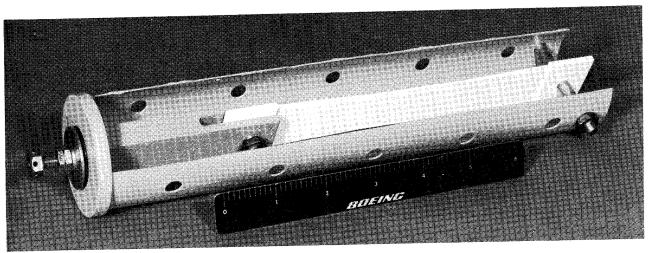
Cutaway of Stressed Tension Specimen Fixture
